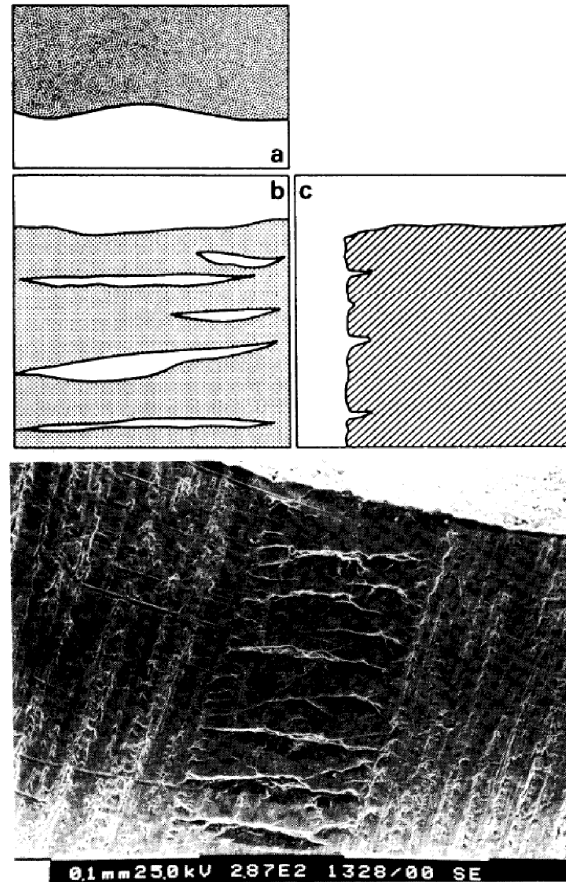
Broken martensite as a crack origin. At the top of the figure, (a) the fatigue crack fracture plane, (b) the wire surface and (c) a section through the defect are shown schematically [78].
